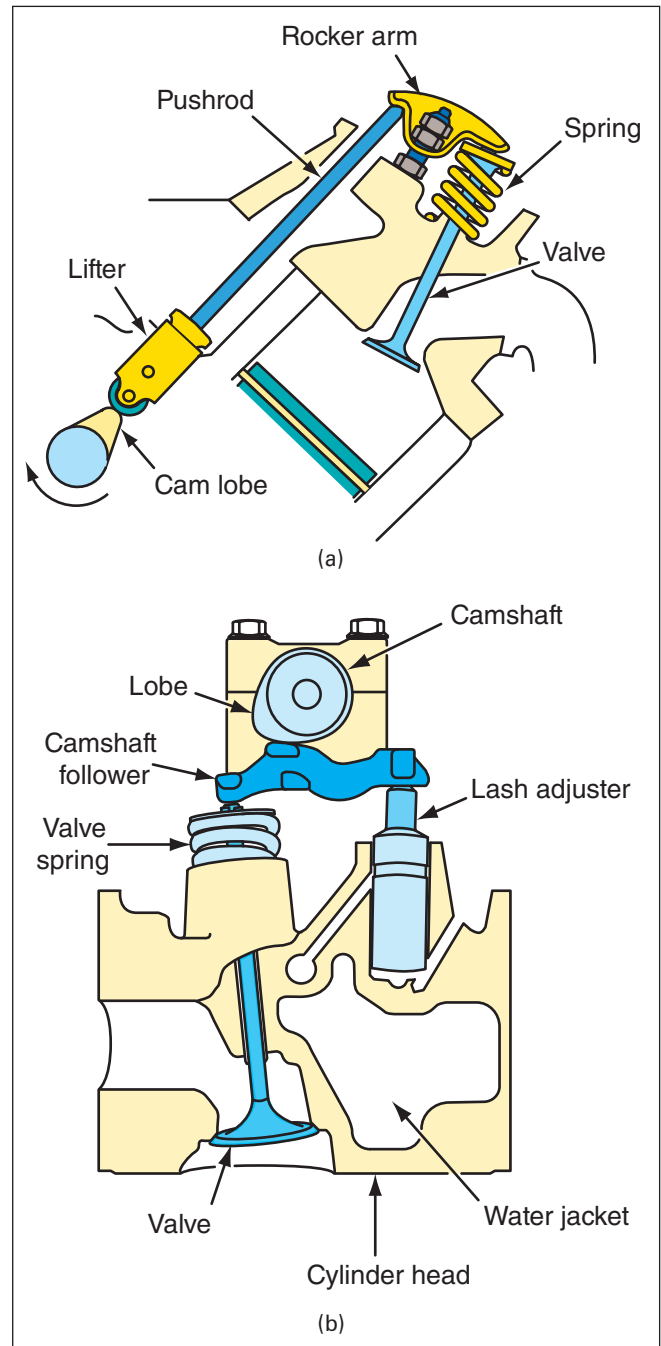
A cam lobe forces the valve open. (a) The cam-in-block design uses pushrods to open valves. (b) In the overhead cam design, the camshaft is located in the cylinder head.
